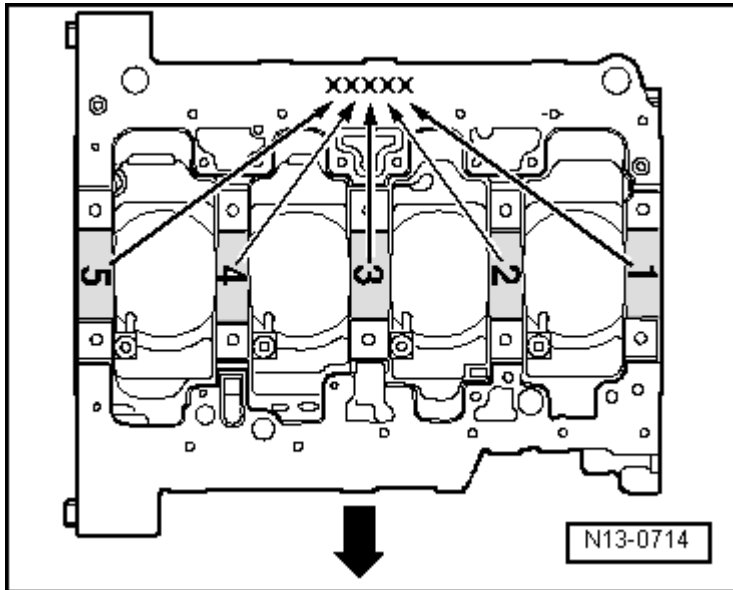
Identification Of Crankshaft Bearing Shells For Cylinder Block (Gradual Introduction) - Engine Codes AEG, AVH, AZG, BEV
